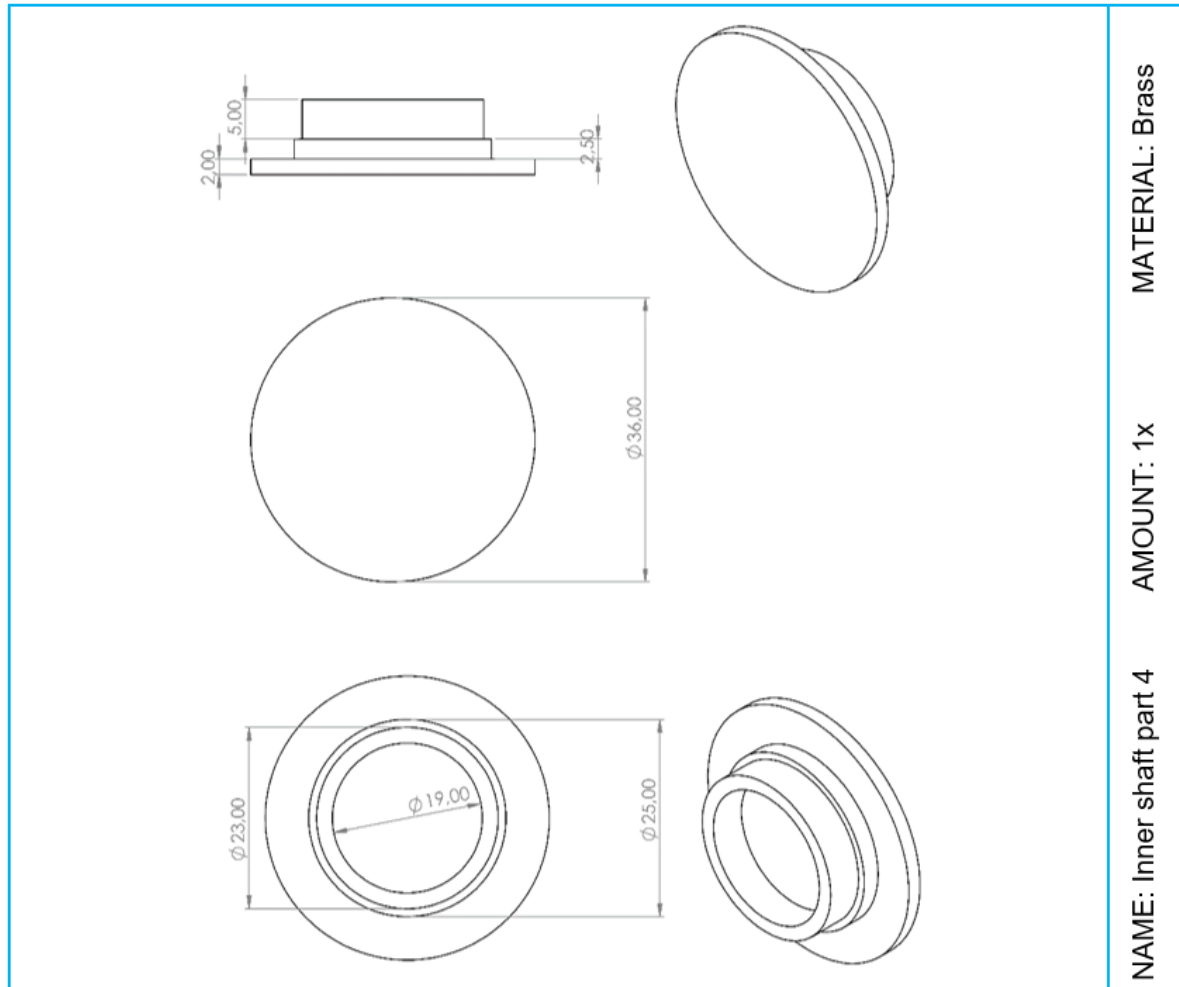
Construction drawings of the inner shaft part 4 - Machined prototype
